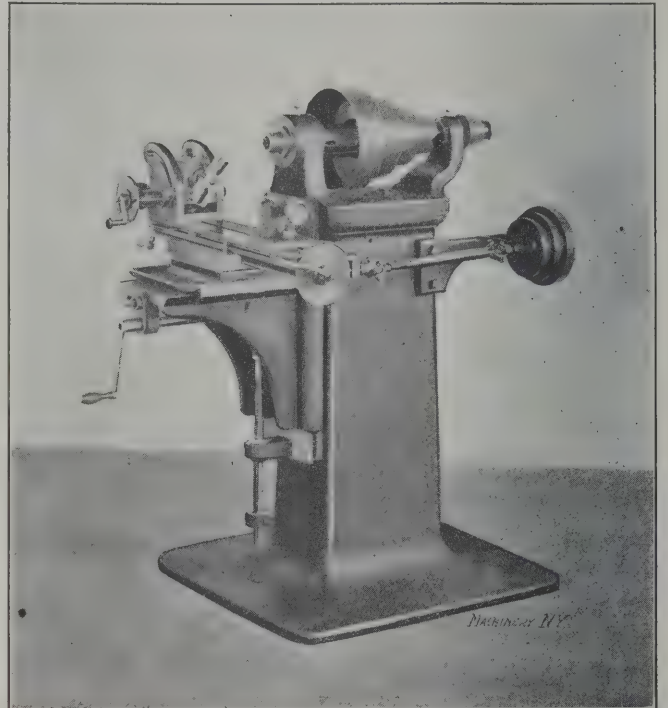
First Universal Milling Machine. Built about 1865 by Joseph R. Brown, of Brown & Sharpe Mfg. Co.
